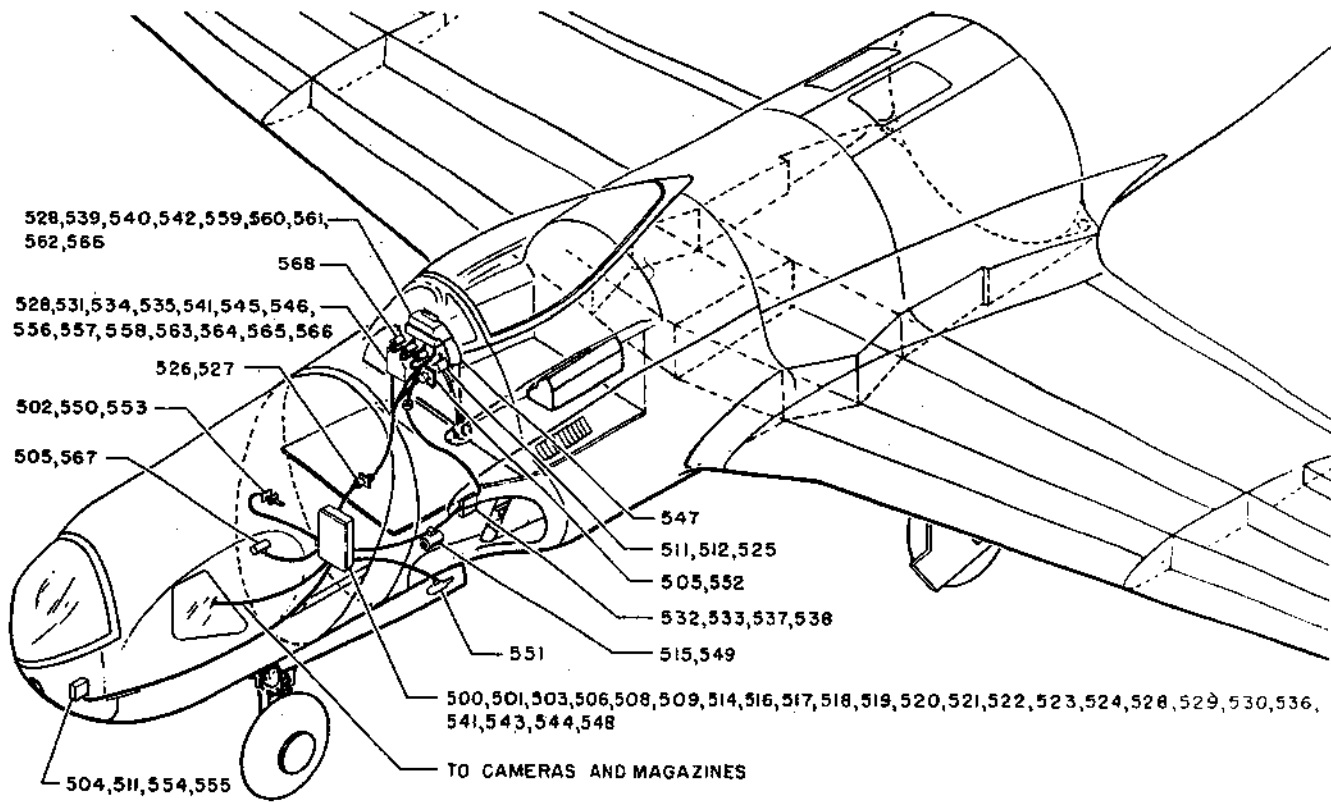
(Sheet 1 of 3 Sheets) — Centrifuge Interconnecting
